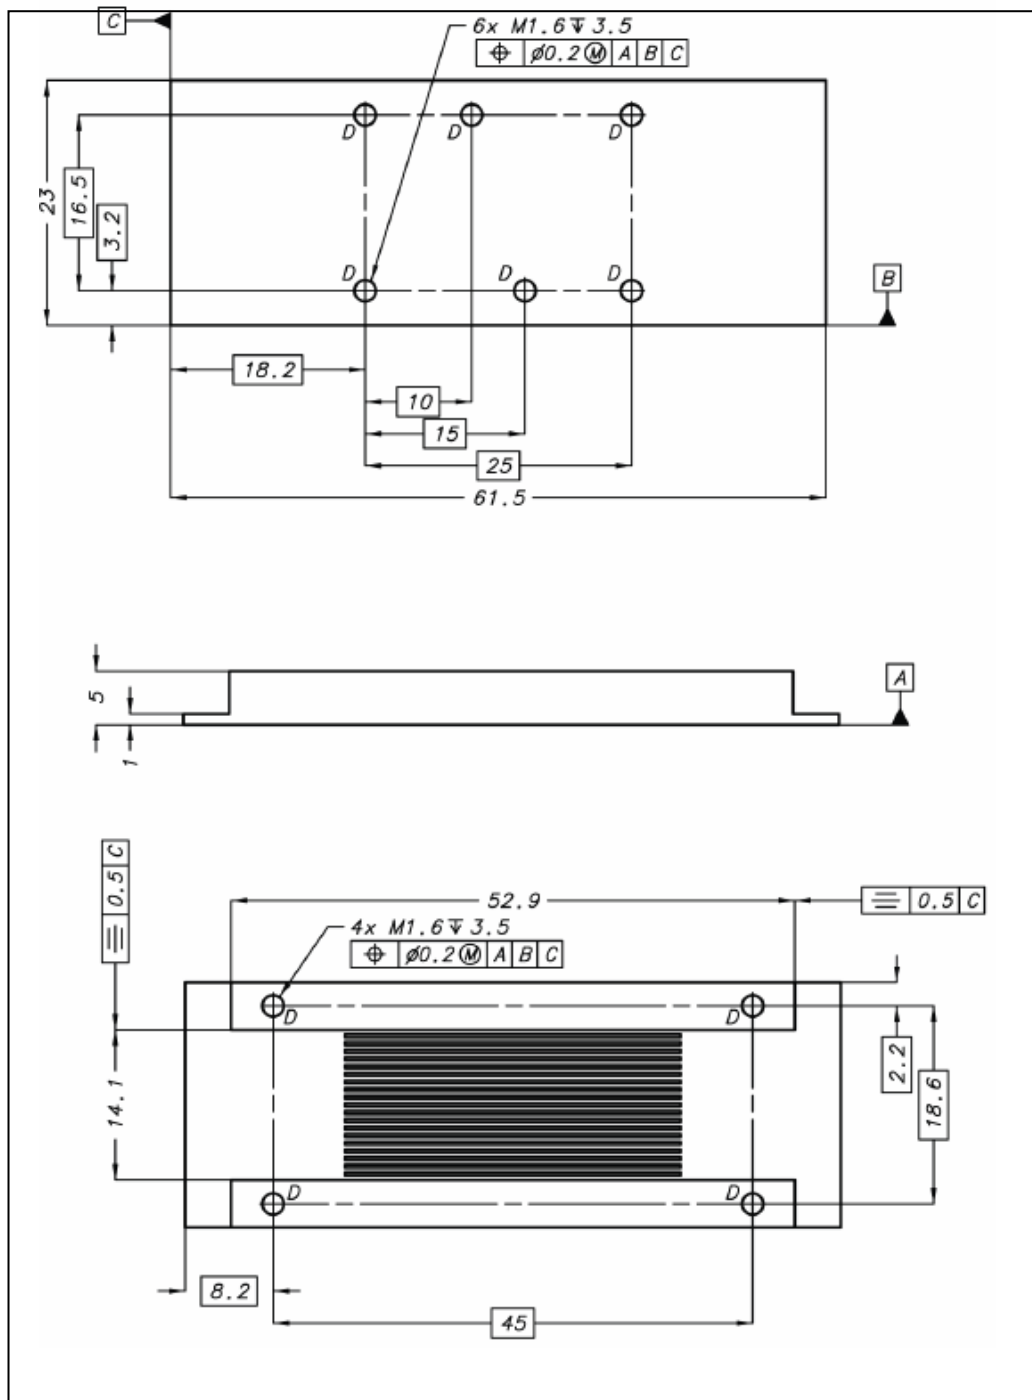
420  $\mu\text{m}$  heatsink body dimensions
